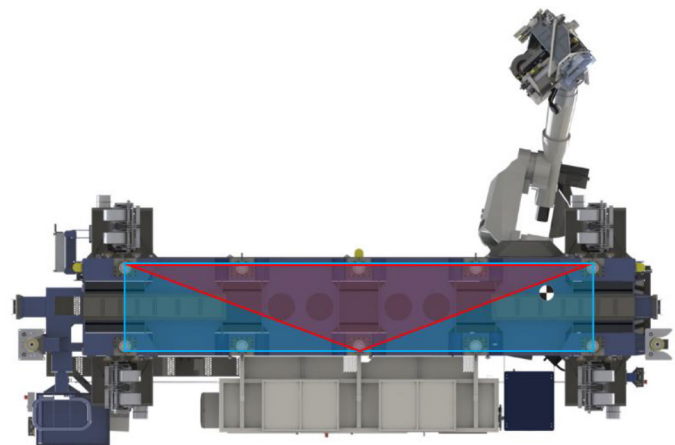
Structural support and stability benefits of a multi-point planar floor interface over three-point contact.
